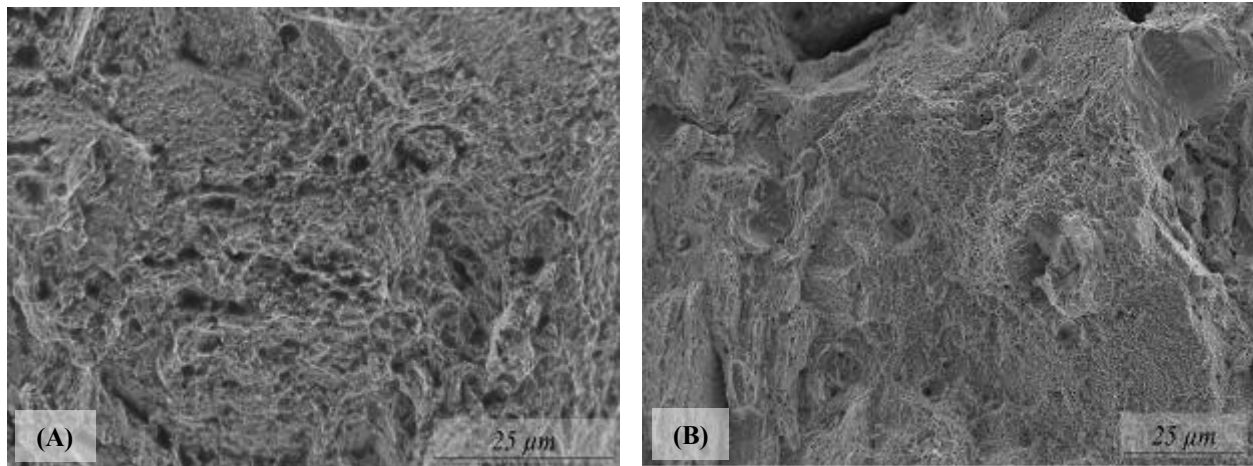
SEM images of fracture surfaces of failed SLM as-fabricated specimens. (A) Shows the fracture surface of binder jetting X orientation and (B) of Z orientation
